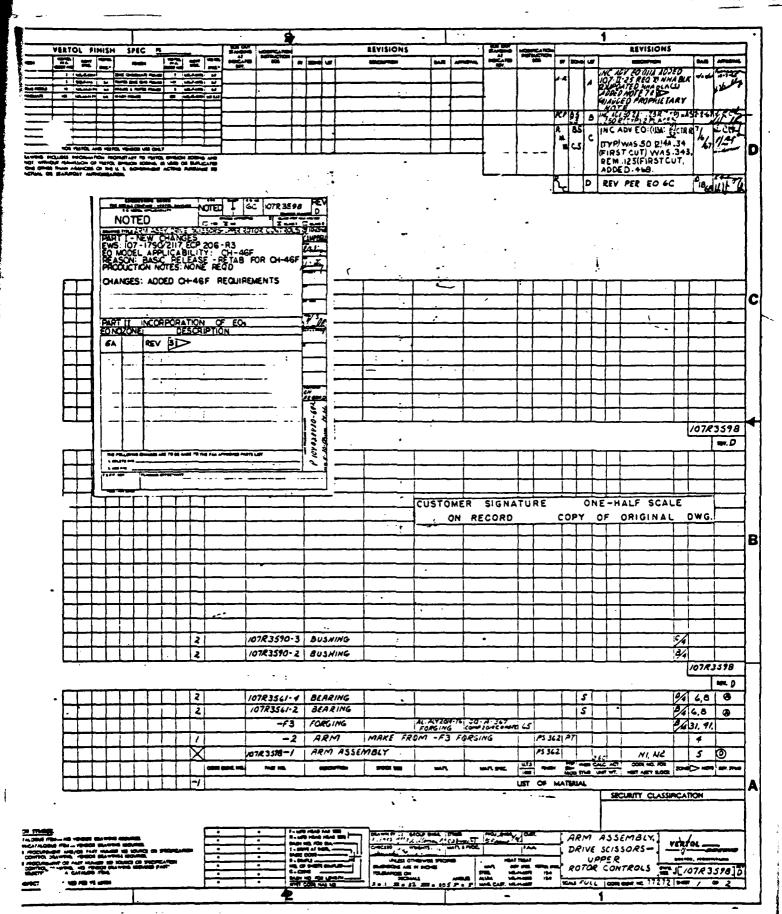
Drawing 107R3598, Drive Scissors Arm Assembly, Upper Rotor Controls (Sheet 3 of 3)
